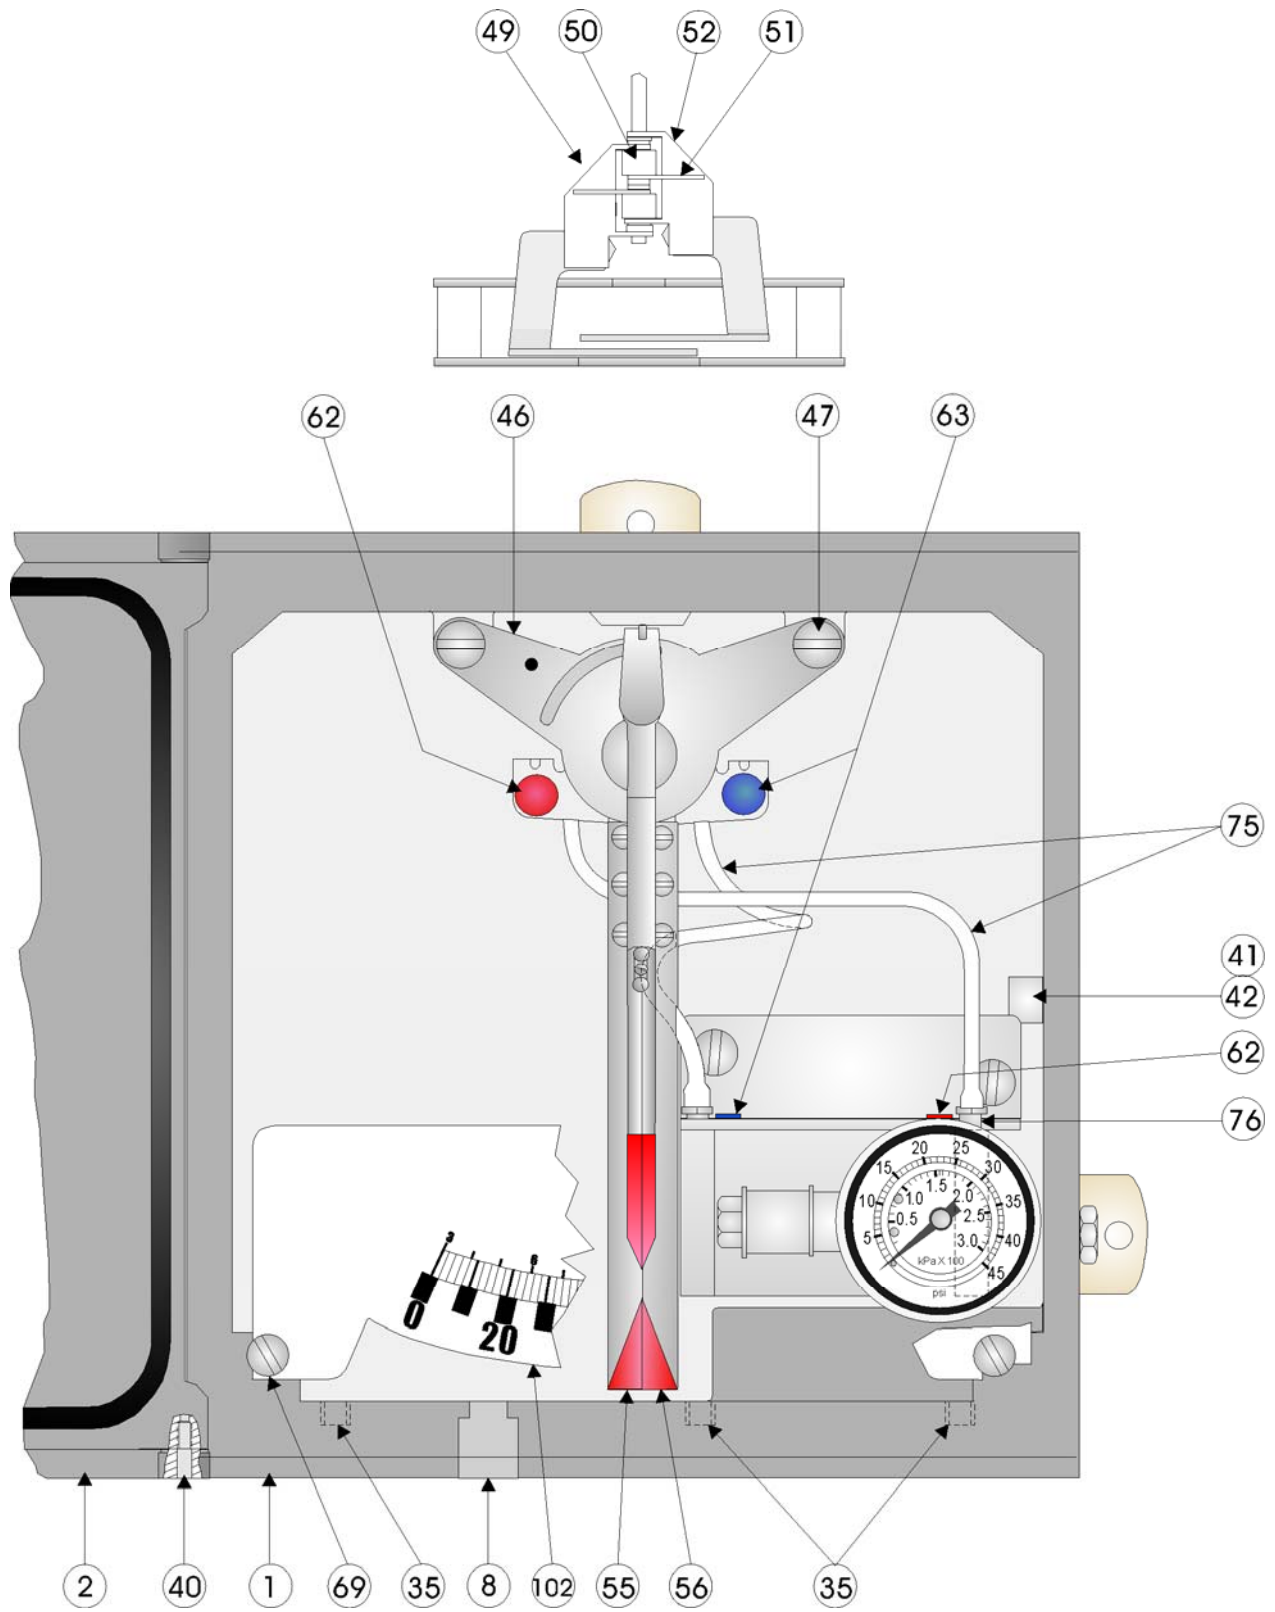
A - Diff. Gap Controller Instrument Assembly (Less Measuring System)
